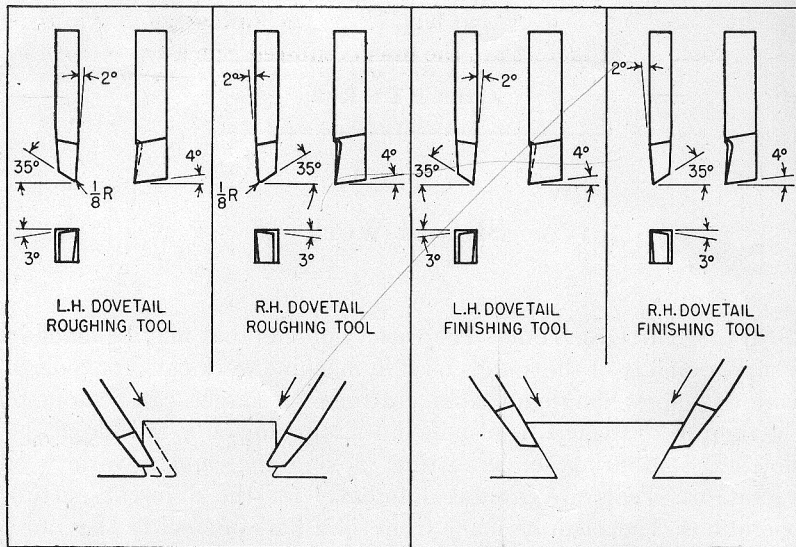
Shaper tools for cutting cast iron. (The Cincinnati Shaper Company)
